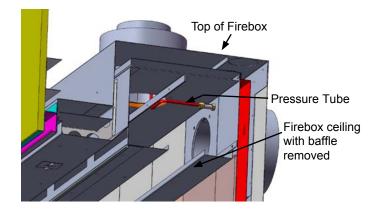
Removal of Top Vent air baffle and pressure sensing tube. (cutaway view)
